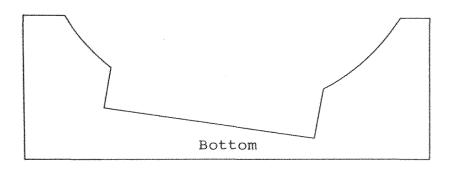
TEMPLATES FOR CUTTING THE CAMERA MOUNTING-BLOCKS
